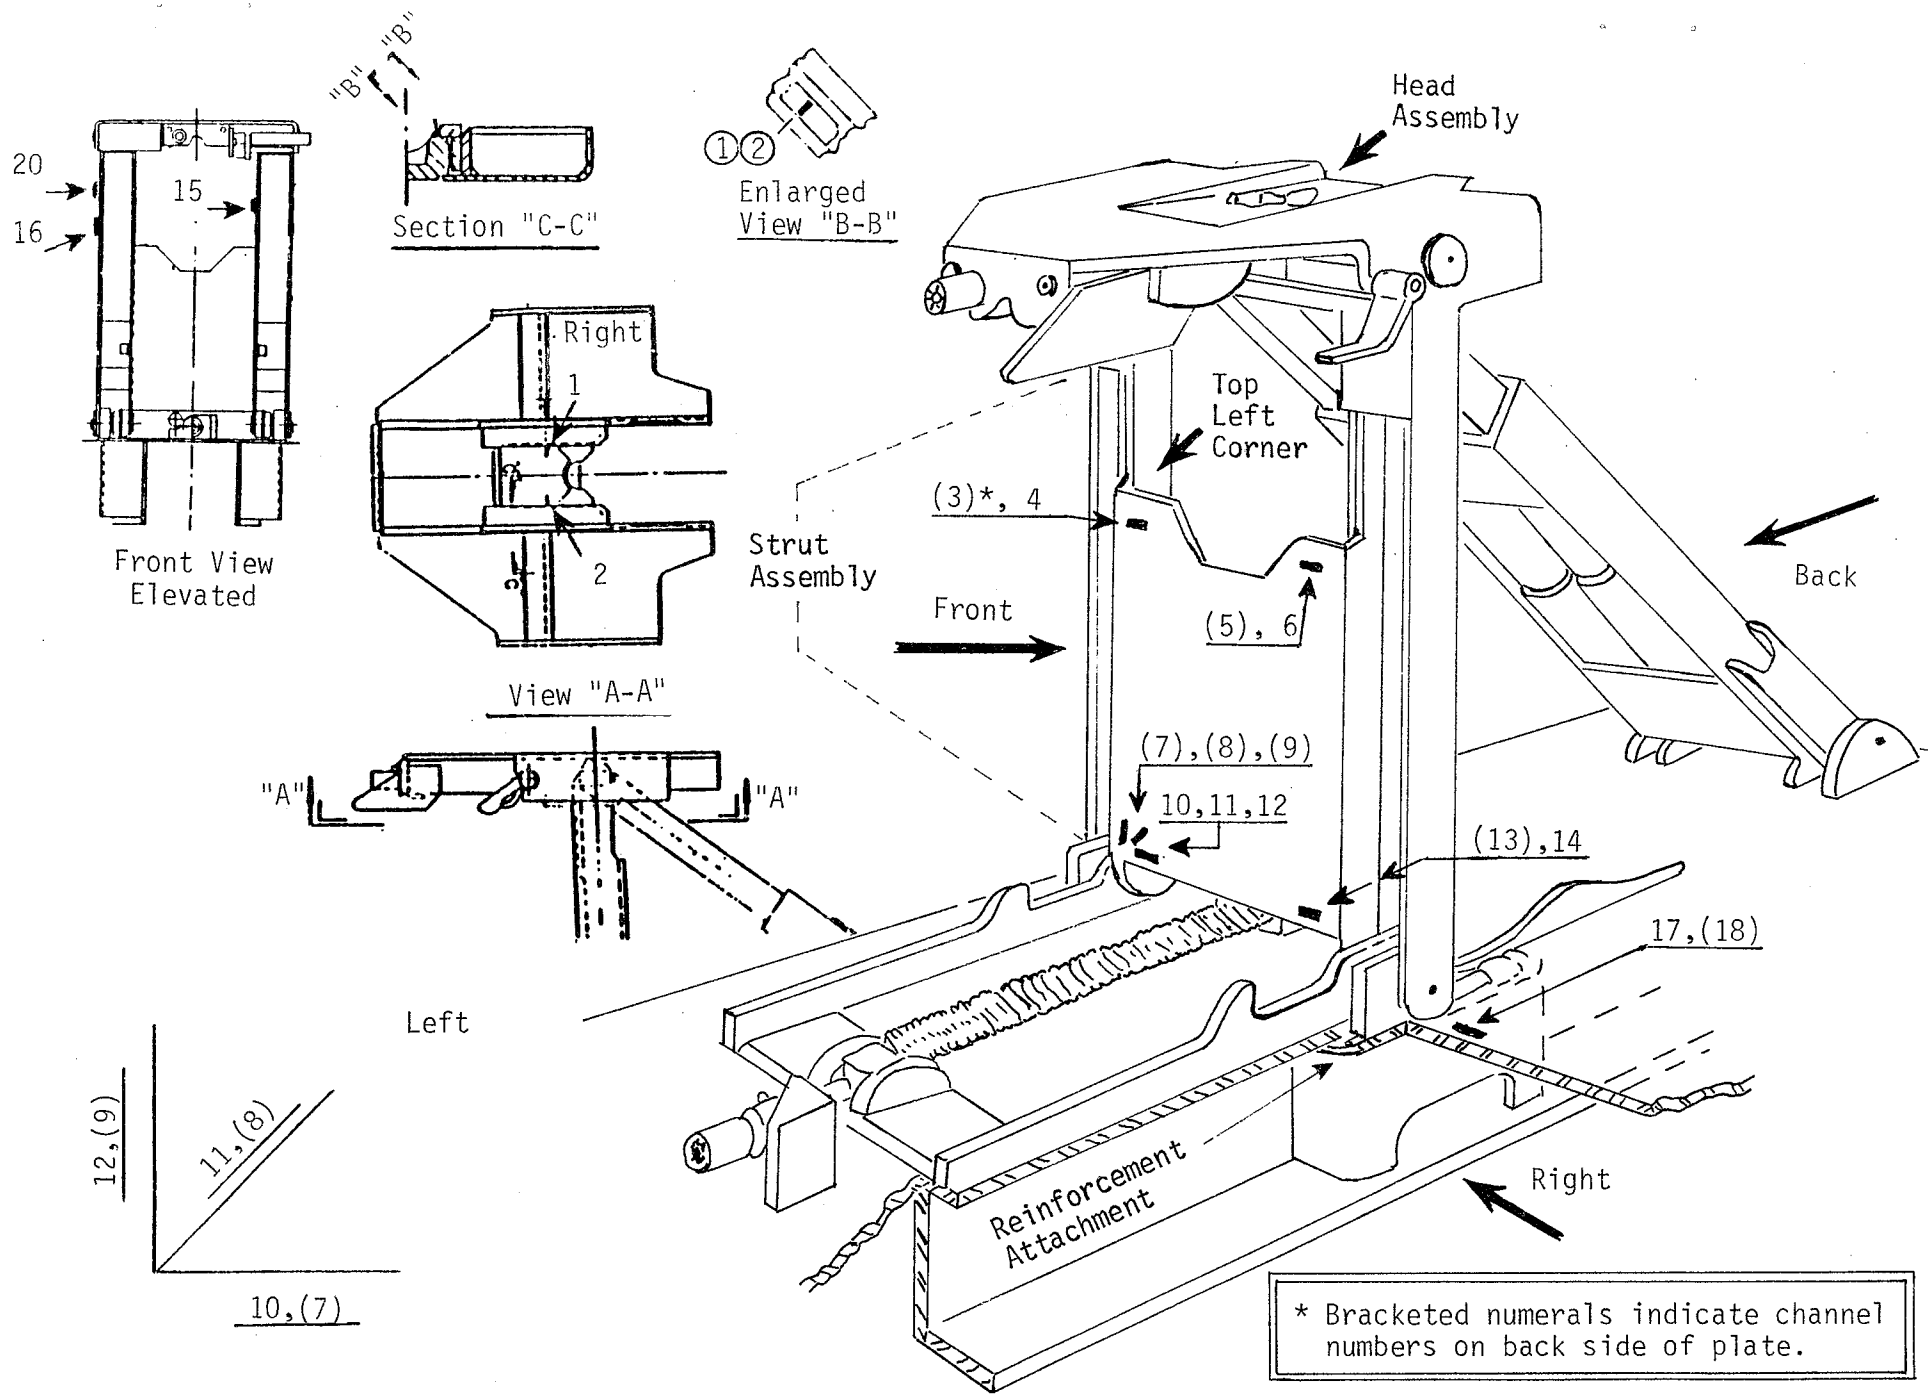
CUSHIONED HITCH ASSEMBLY.
